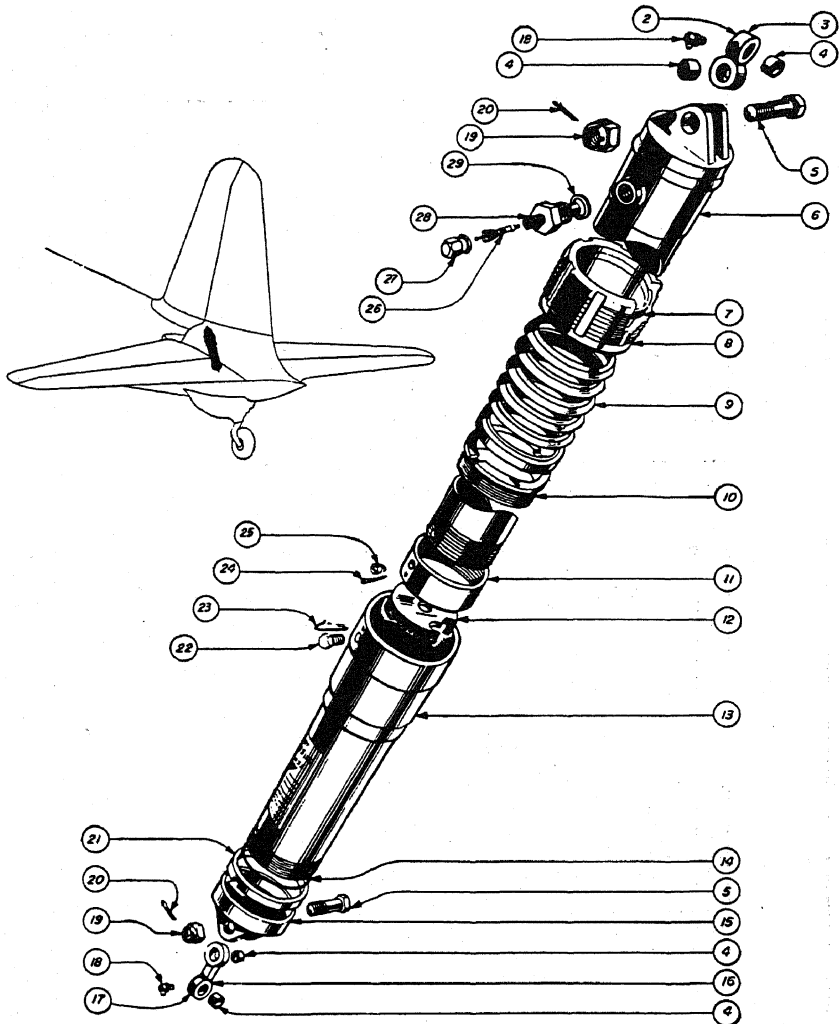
5.—Assembly drawing for illustrated parts catalogue.
